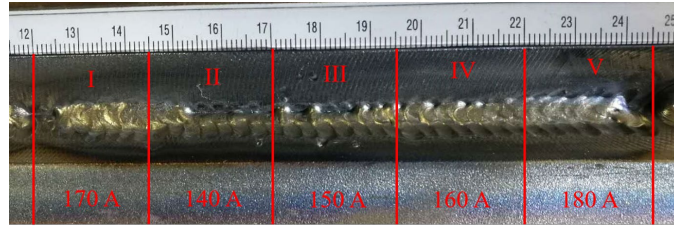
Welded Workpiece from Robotic Weaving Welding with Automatic Seam Tracking.
